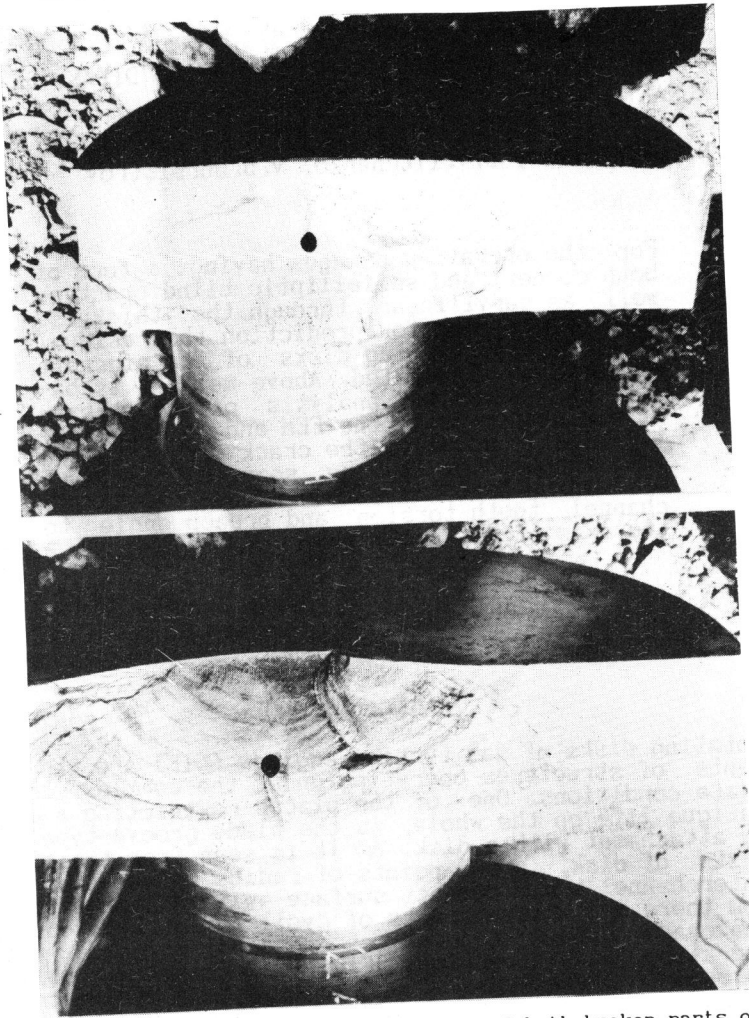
The view of fracture surfaces of both broken parts of a crankshaft.
